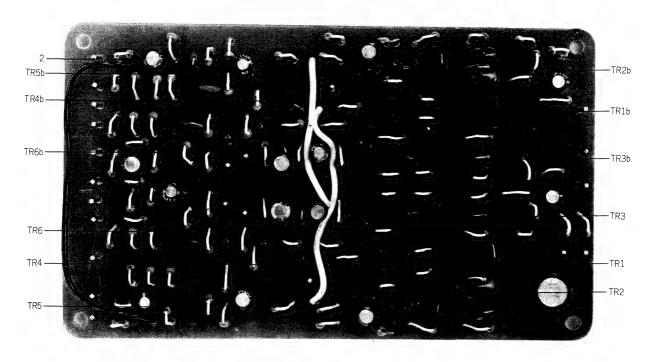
PHOTO OF IF P.C. BOARD (91-5033) BLOCK
